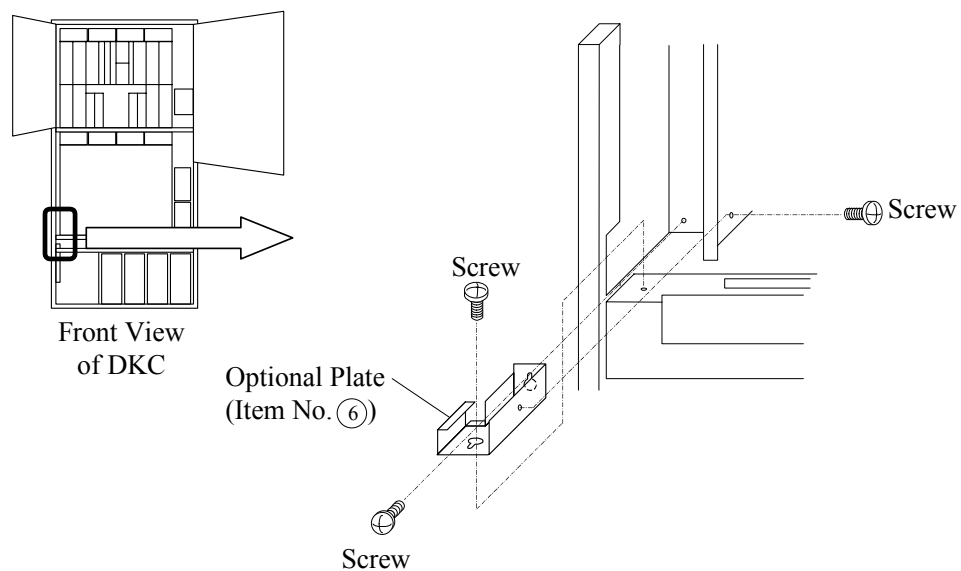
Attachment of Plate (Item No. ⑥ in Parts List)
